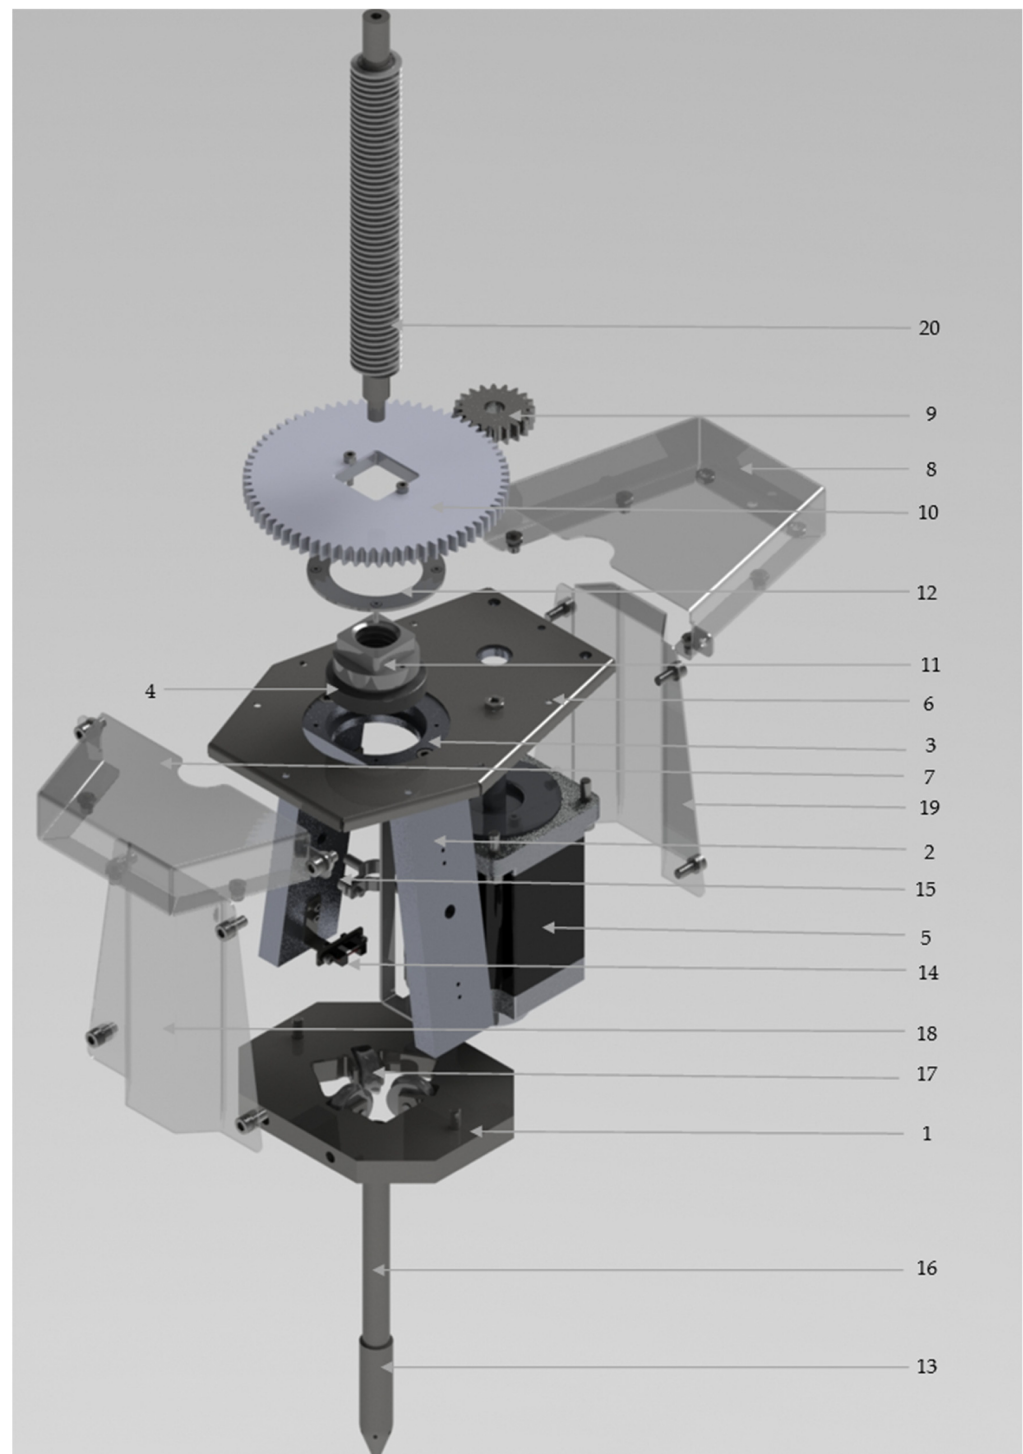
Exploded view of the proposed root-targeted steam injection module illustrating its structural architecture, the main mechanical components, and their assembly (1—Base plate; 2—Support columns; 3—Top plate; 4—Bearing; 5—Stepper motor; 6—Cover plate; 7—Left cover; 8—Right cover; 9—Pinion; 10—Driven spur gear; 11—Custom trapezoidal-thread nut; 12—Circular bearing retainer; 13—Steam injection nozzle; 14—Slotted optical switch; 15—Circular position detection element; 16—High-pressure steam pipe; 17—Pipe guide rollers; 18—Left lower cover; 19—Right lower cover; 20—Custom trapezoidal lead screw).
